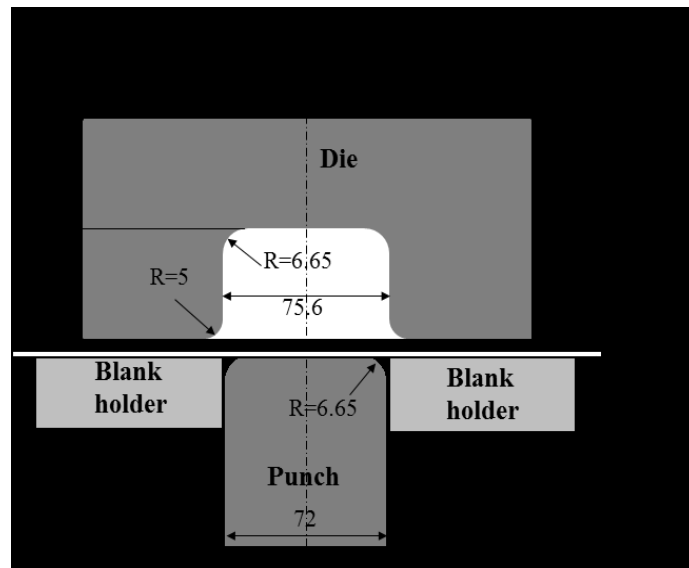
Schematic diagram of U-shaped components stamping tool set.
